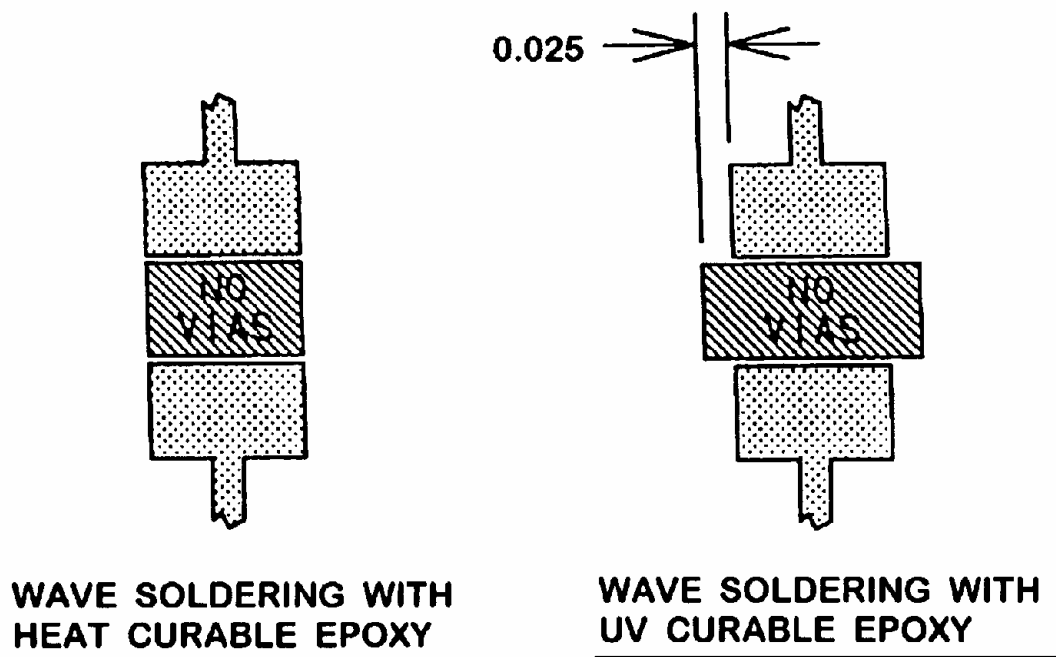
VIA PLACEMENT FOR SOLDER SIDE CHIPS
